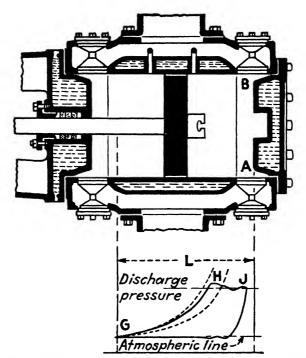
Indicator card showing conditions inside compressor cylinder.
